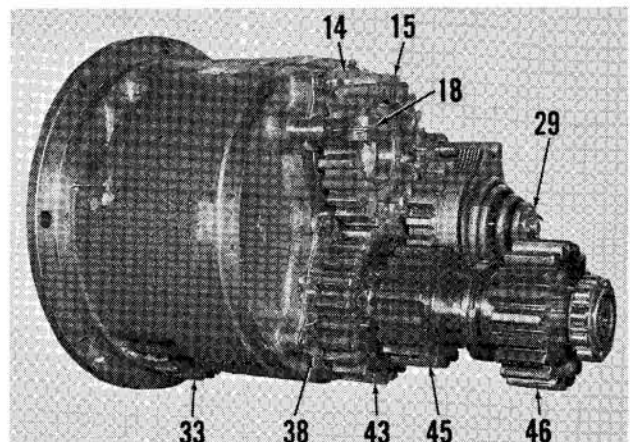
View of primary gearbox assembly; refer to Figs. 131 and 140 for legend.
